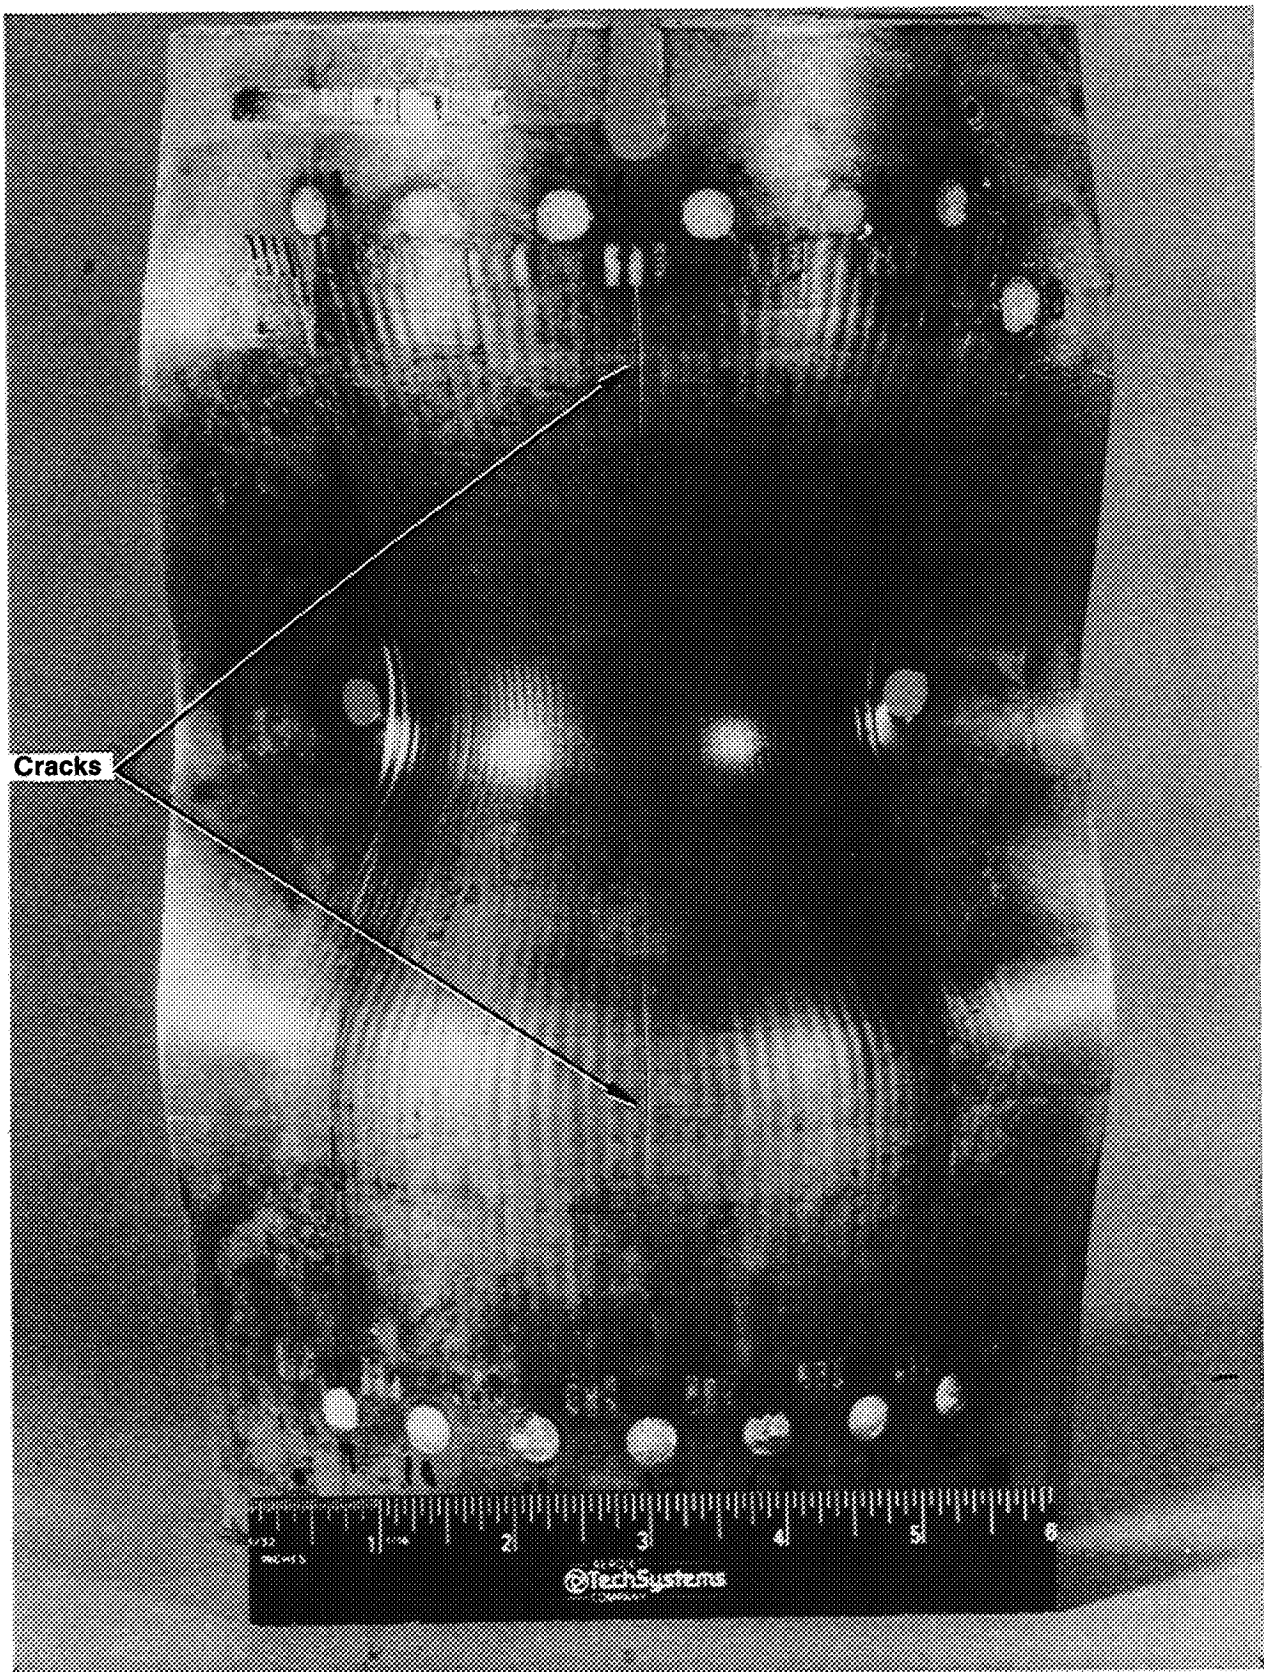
Parts Formed in 2 Steps Cracked the Close Out of the Part
